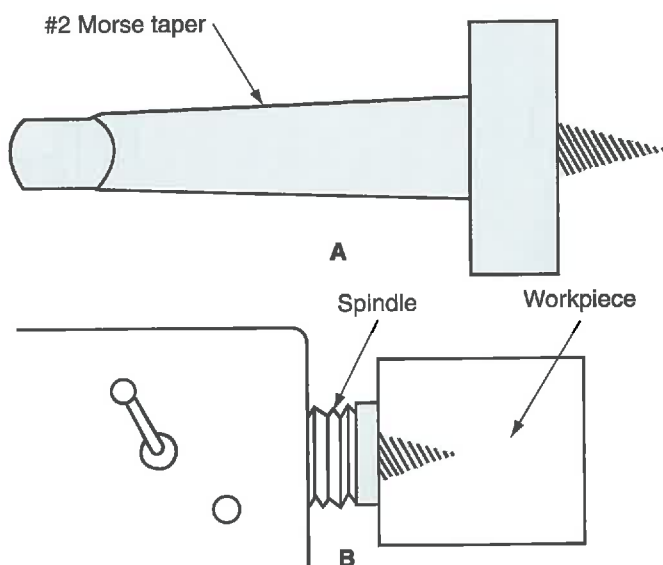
Mounting a workpiece on a screw-thread faceplate. A—Insert the faceplate into the spindle. B—Thread on the workpiece.
